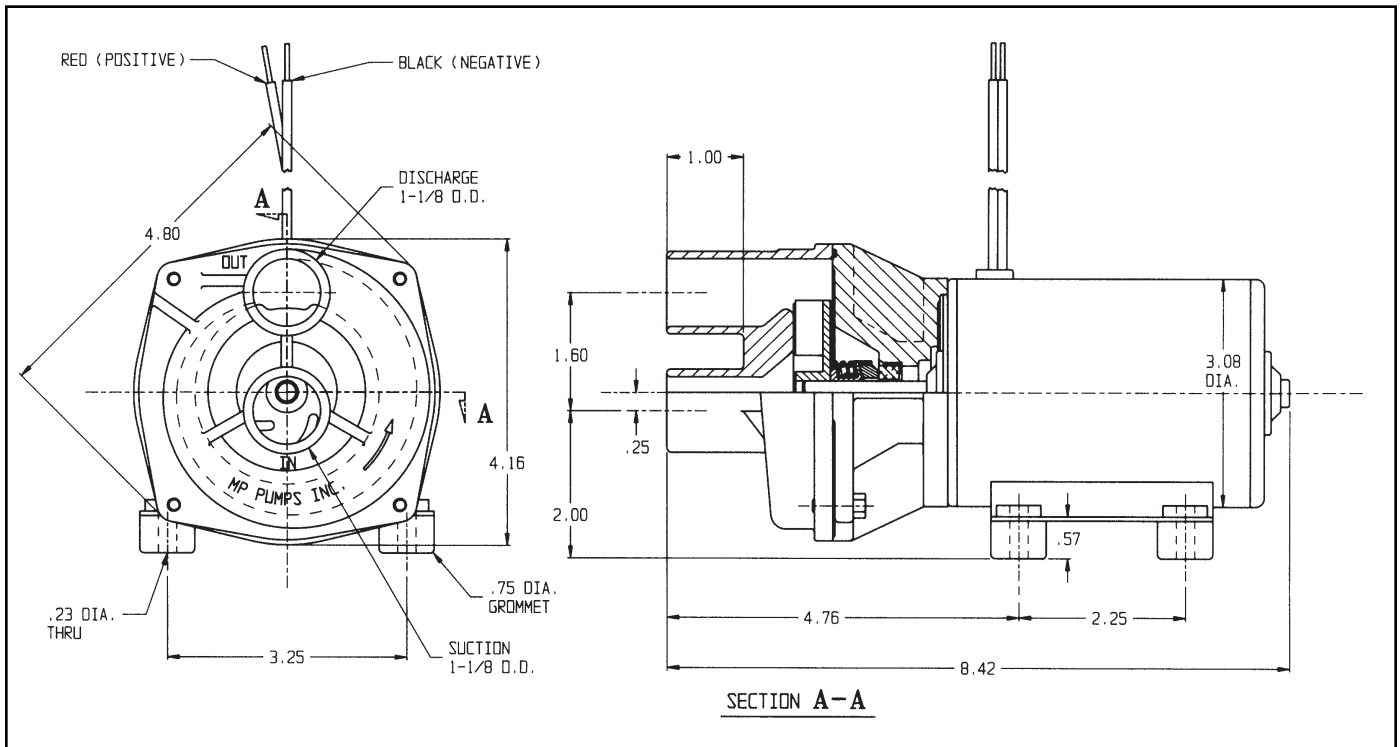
Coolant Circulating Pump Assembly (P.N. 906017) Dimensions (Inches)
